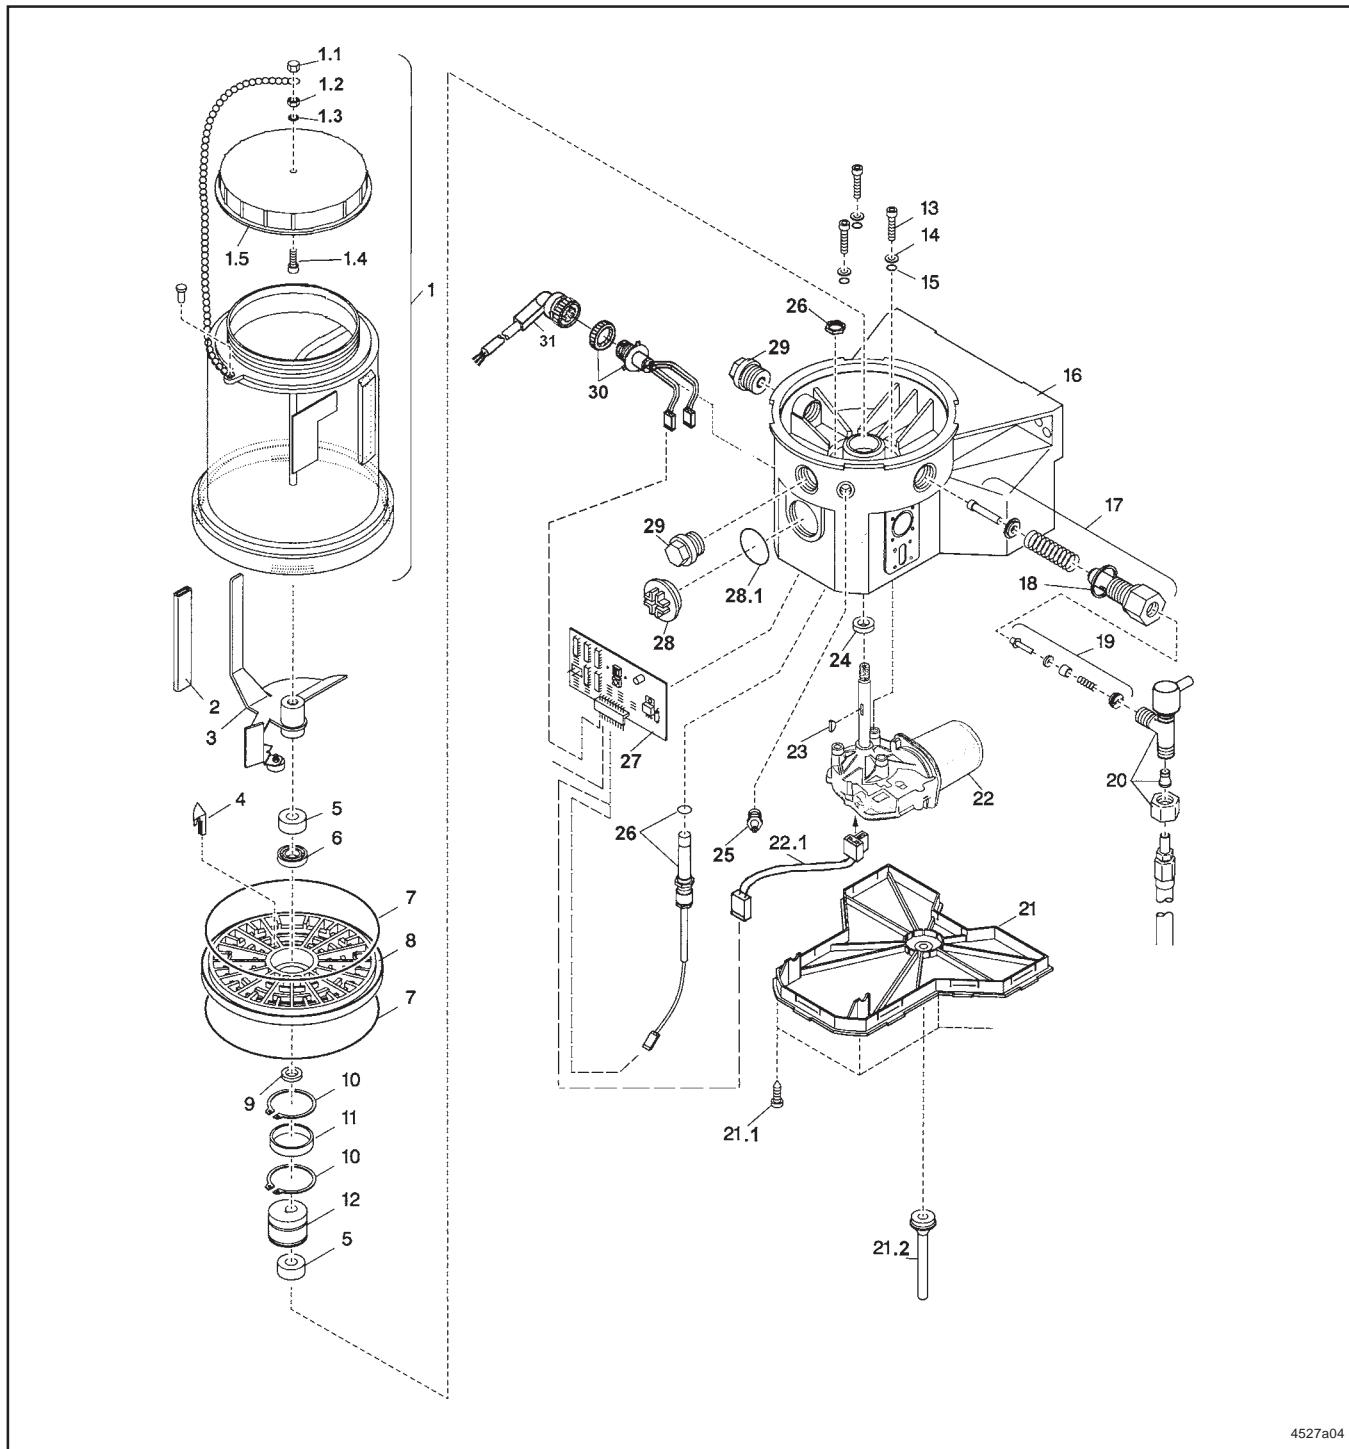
Explosion view for P 203 -2XLBO-K-12/24-1A7.16-V 10 - V13, V20 - V23
